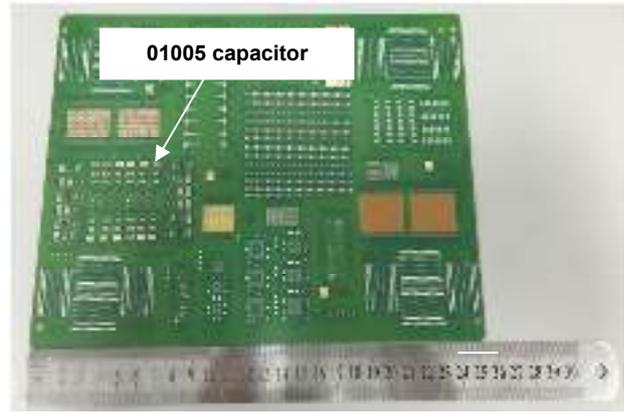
Ultra-fine package (01005 capacitor) mounted on printed circuit board (PCB).
